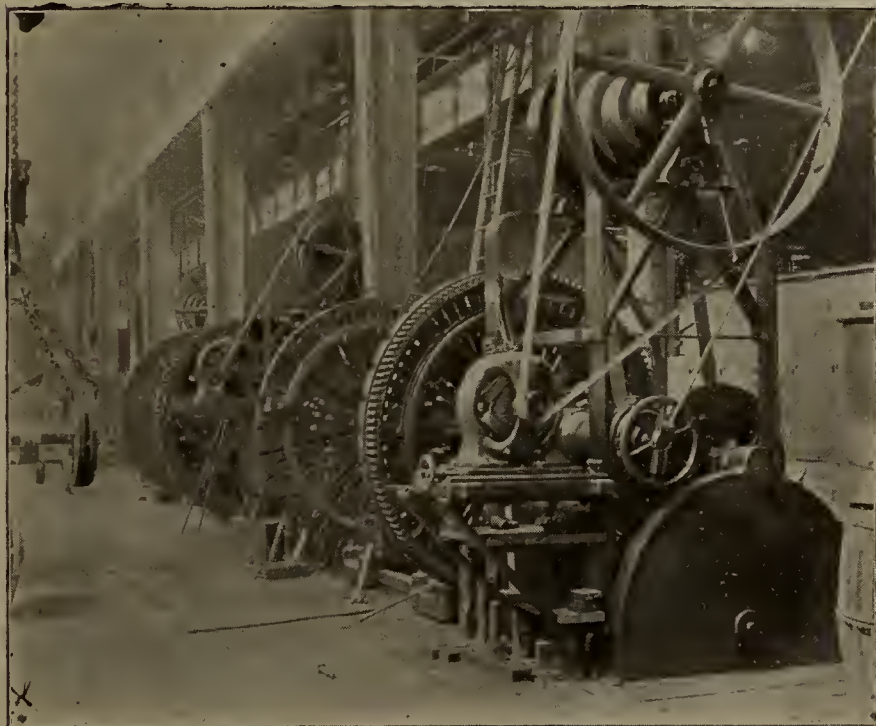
GIBBS MOTOR OPERATING WHEEL LATHE.
